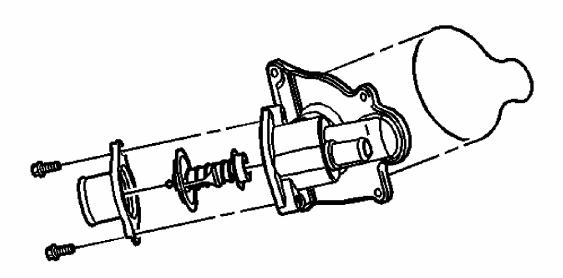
View Of Water Pump Cover Gasket, Water Outlet, Thermostat & Bolts
